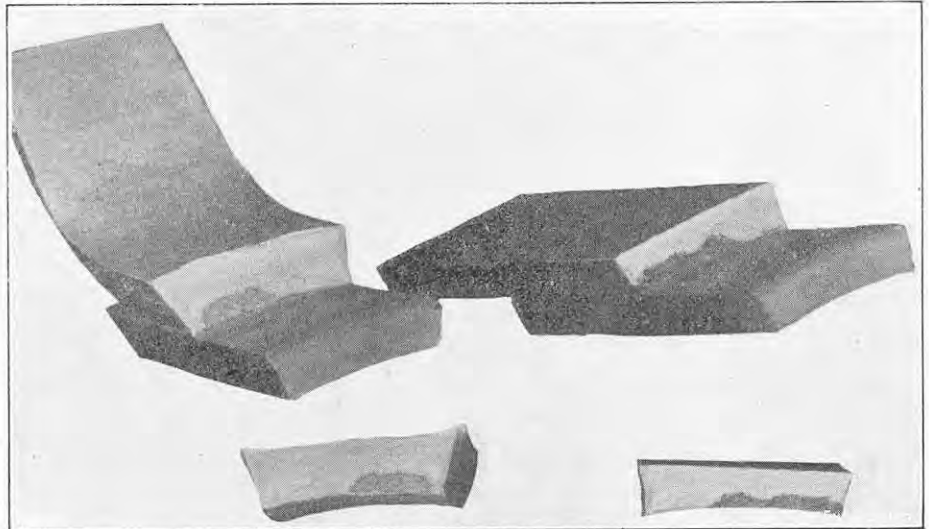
BASAL CRACKS IN WELD ON BACKING RING. $\times 3.5$.
